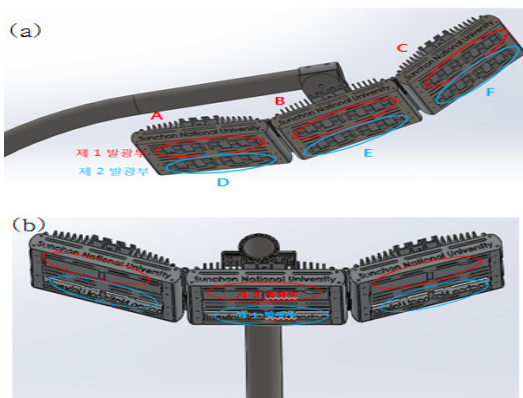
Driving system of lighting fixture for crosswalk (a) vertical markup, (b) horizontal markup.
